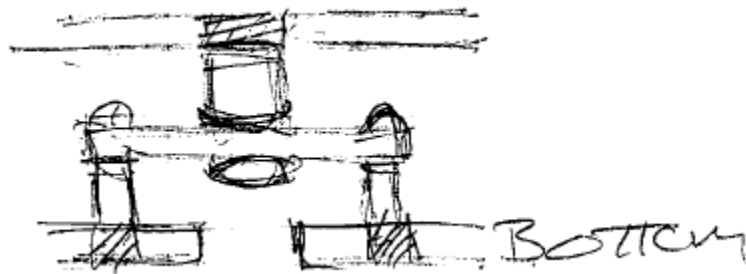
Original sketch of assembly of load cells and outer plate of sensor
